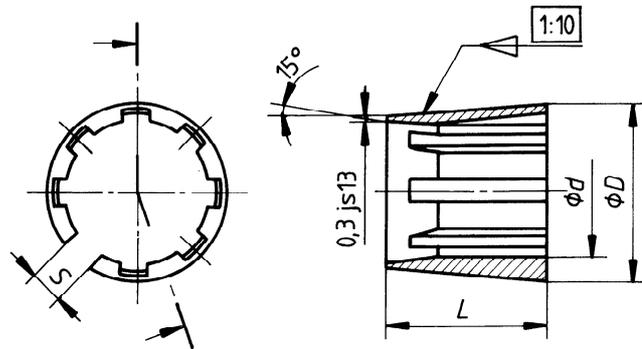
Core bit, type M(DM) (employed in double-tube core barrel assemblies, type DM)
